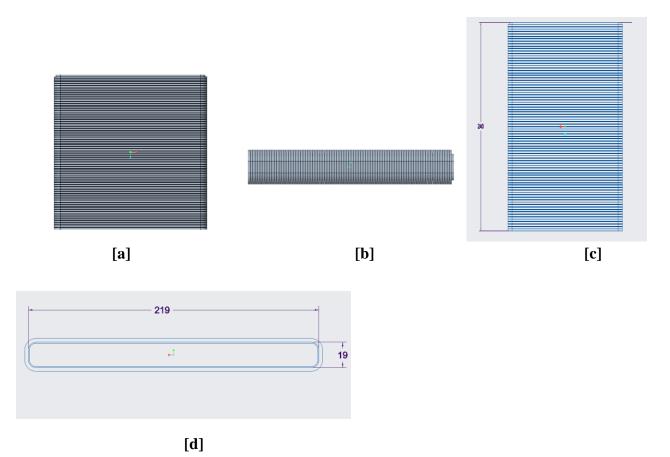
a-Top view of finned tube , b-left side view of finned tube, c-tube for simulation, d-tube dimensions
